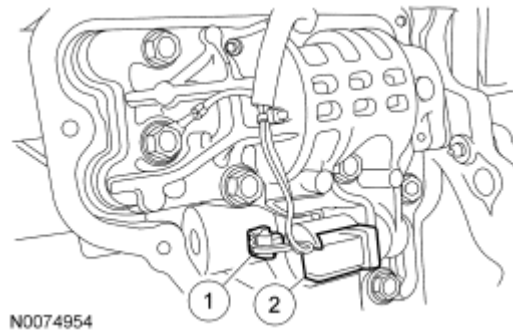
Identifying Electrical Connector For Pressure Control Solenoid B (PCB) & Shift Solenoid F (SSF)
